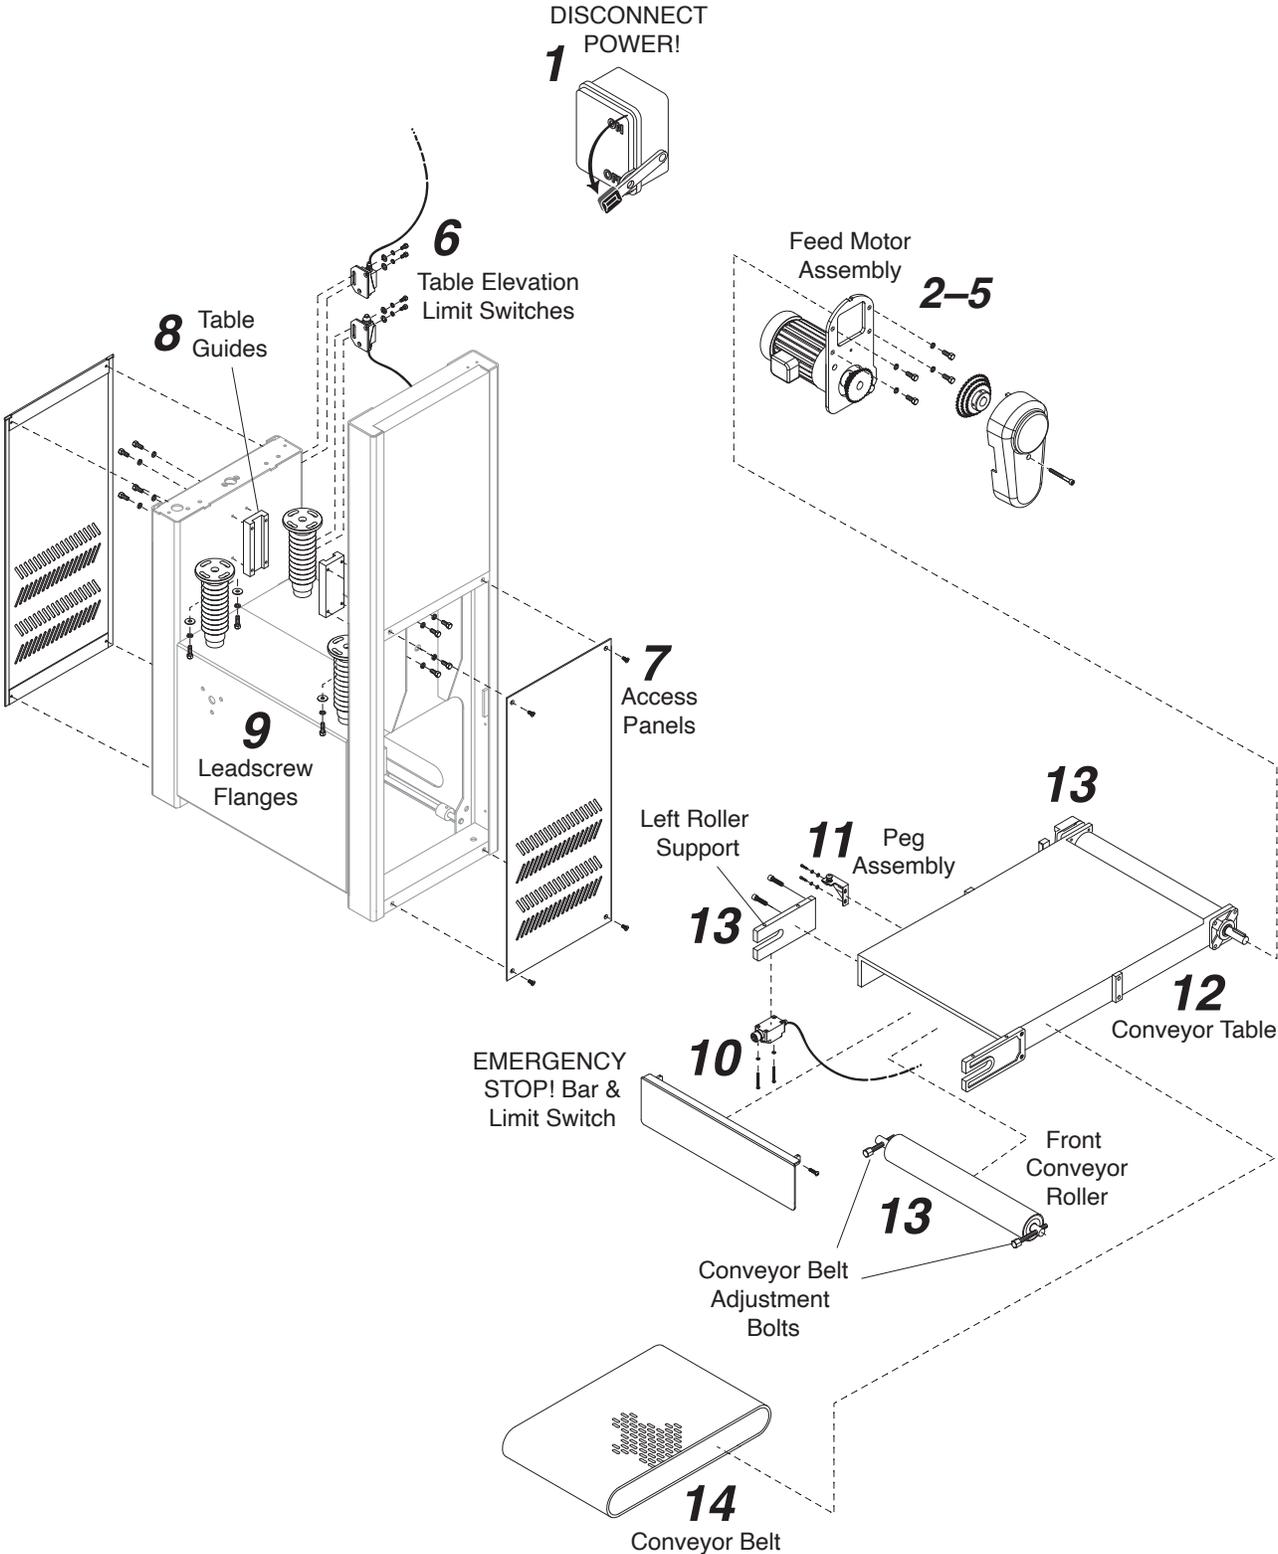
Location of conveyor belt adjustment bolts, roller supports, and conveyor roller.
